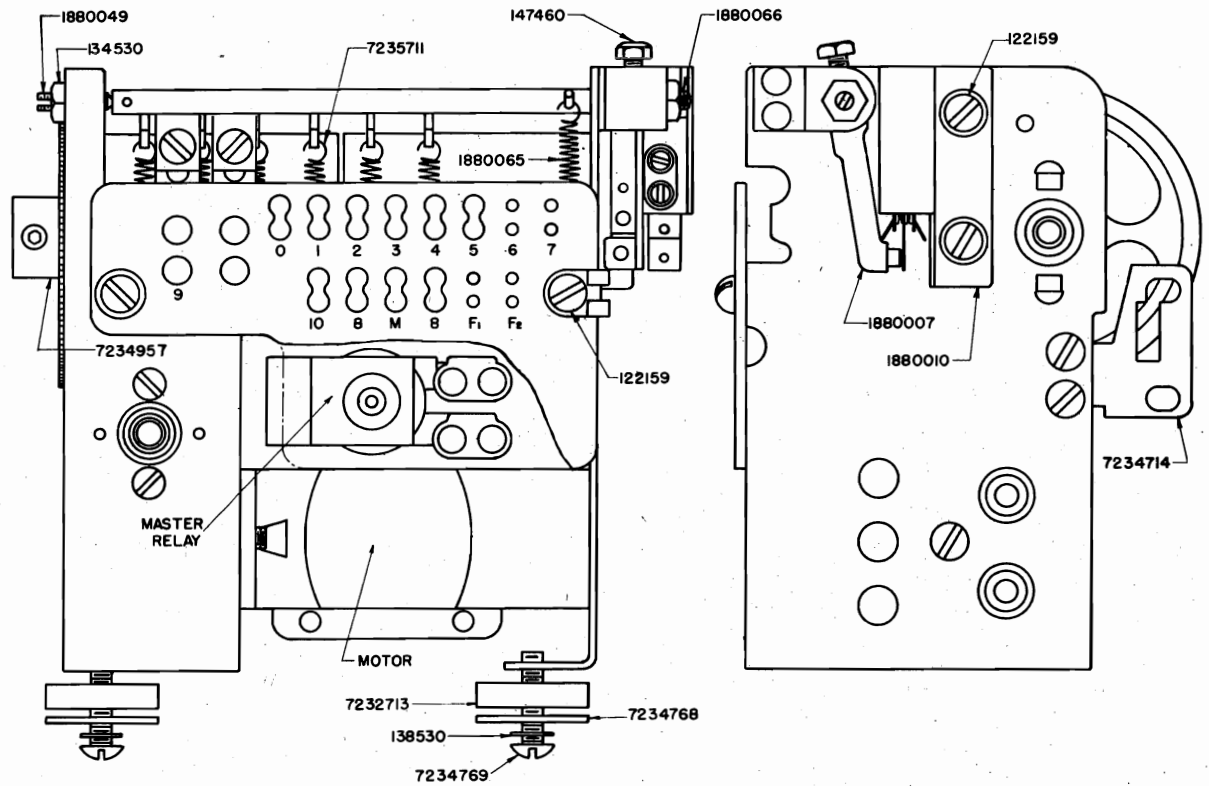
PARTS LAYOUT--DELCO-MATIC TUNER
